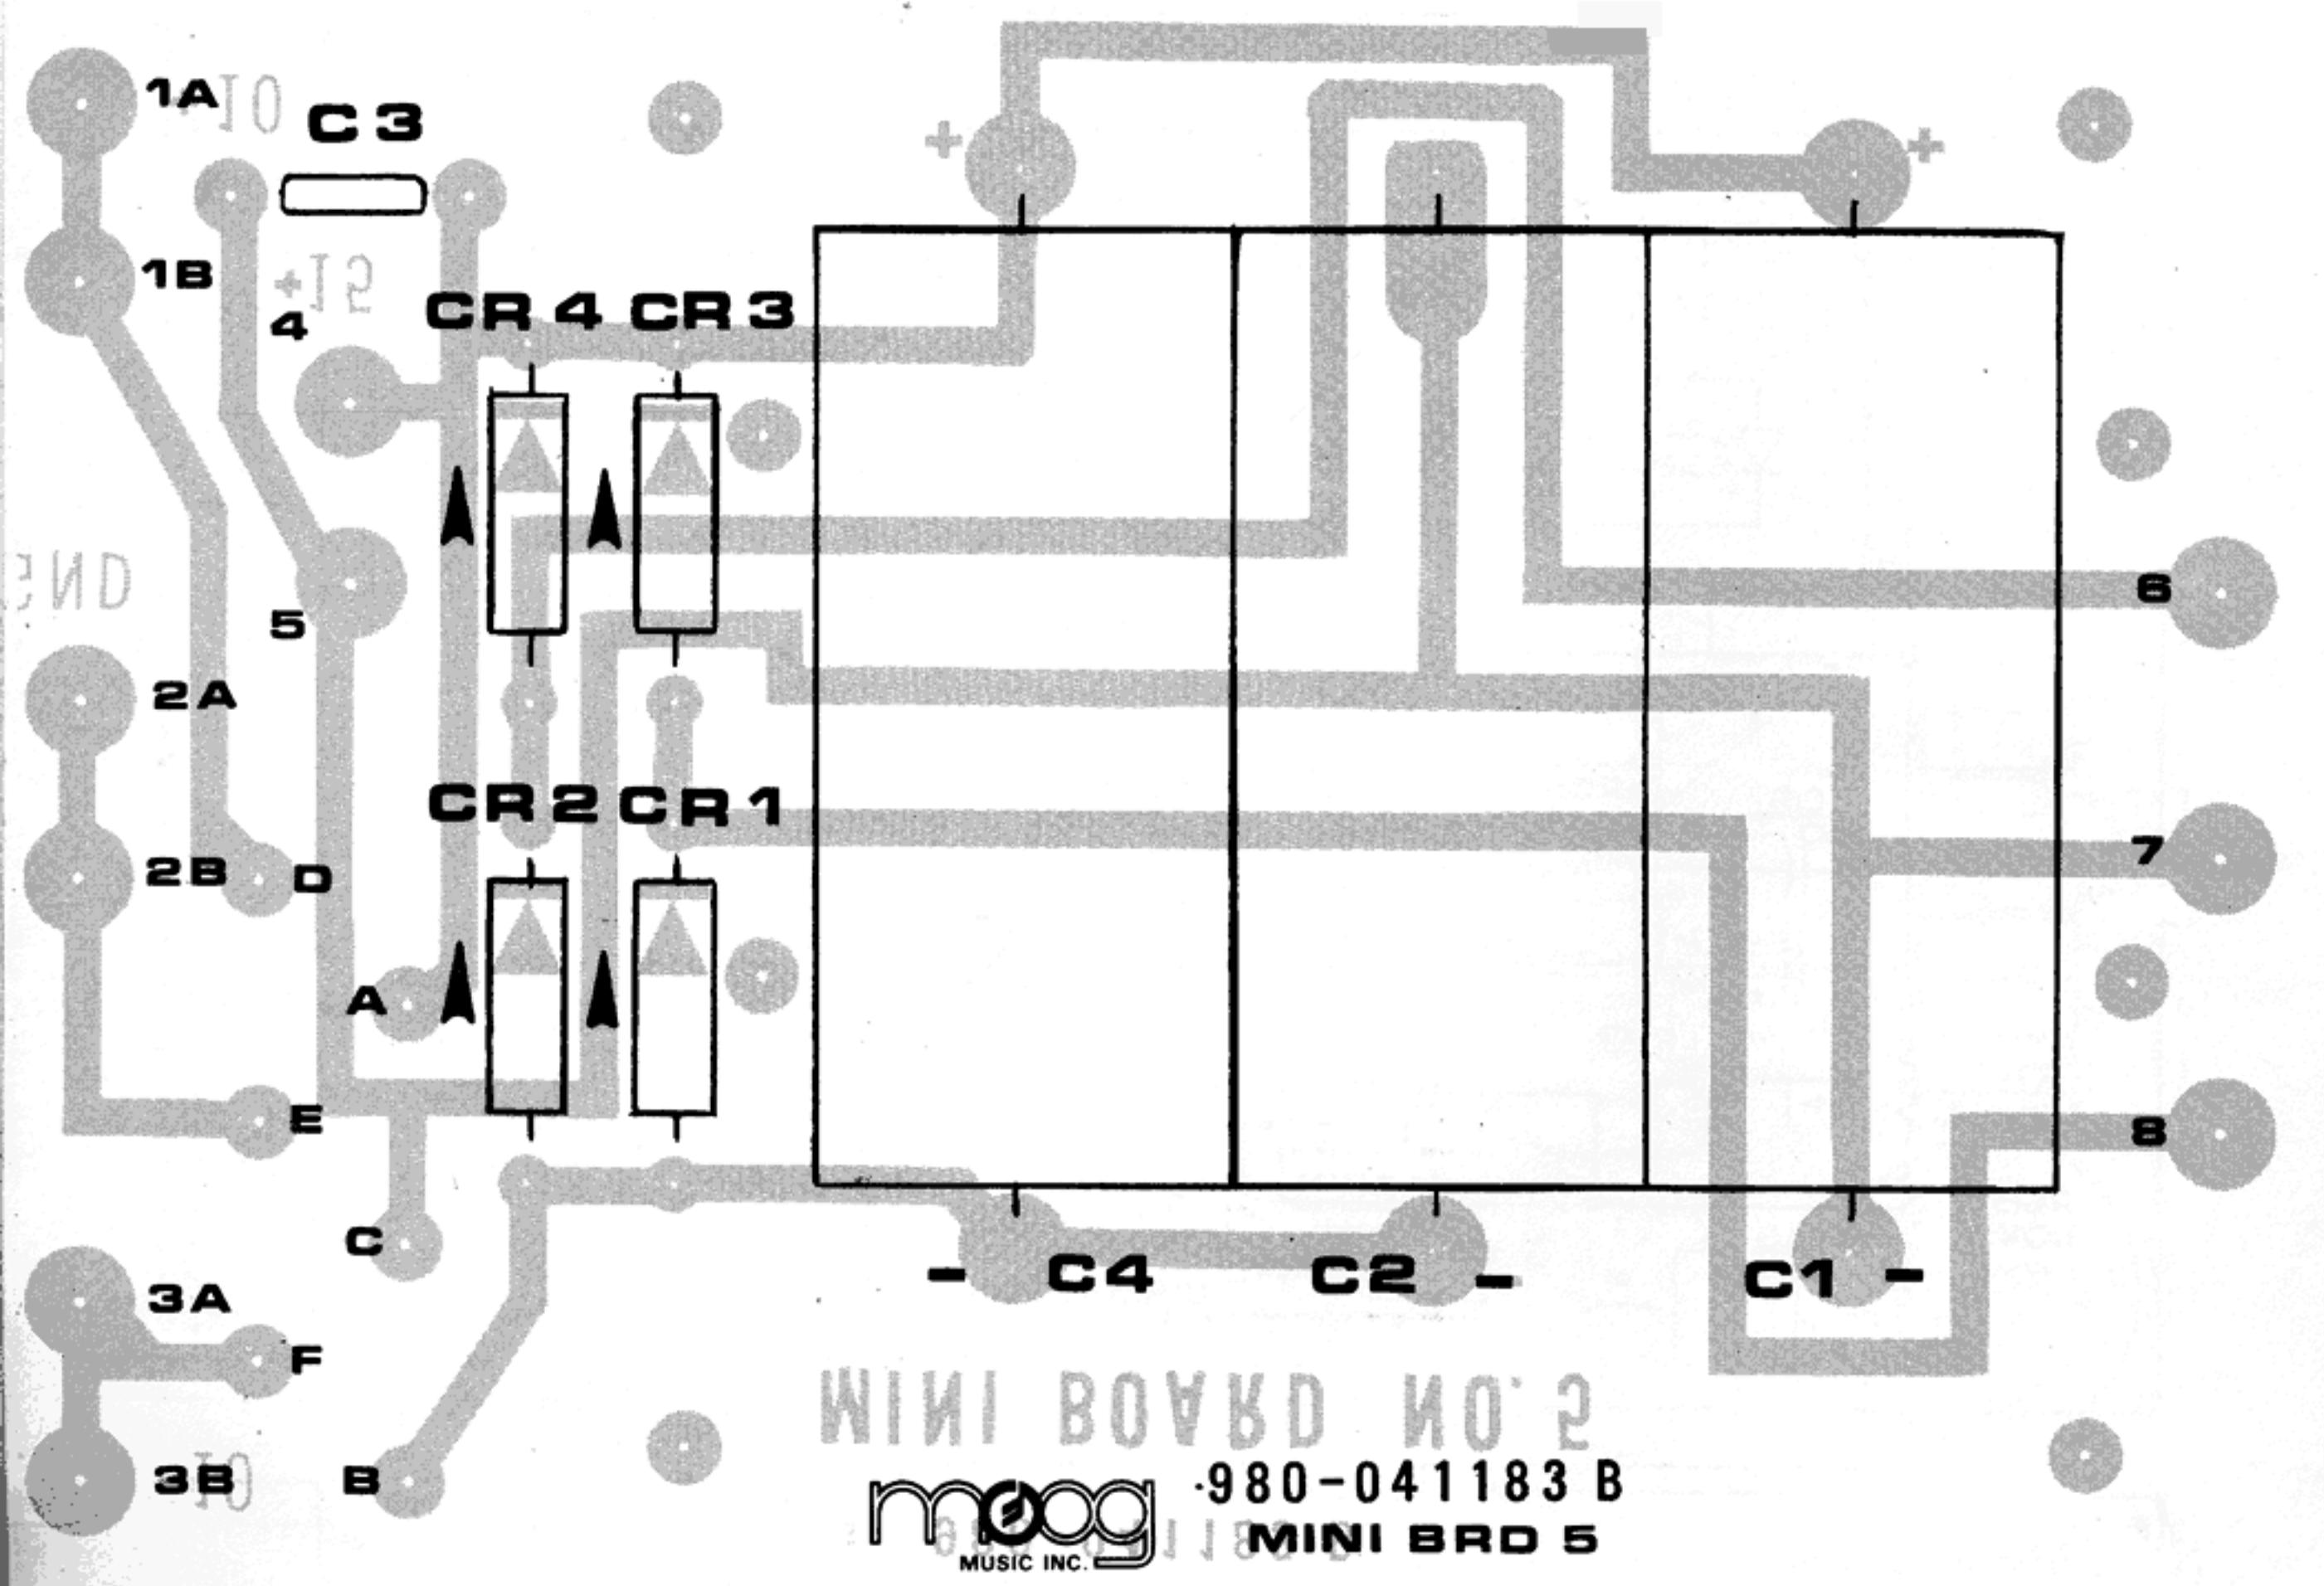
RECTIFIER PRINTED CIRCUIT BOARD NO. 5 SCHEMATIC DIAGRAM AND BOARD ASSEMBLY
